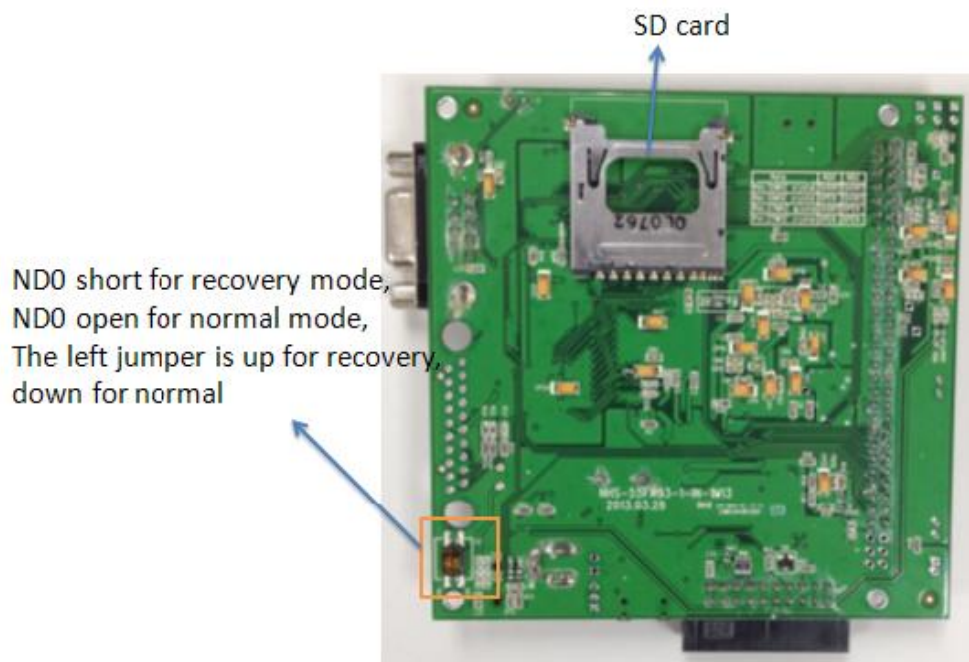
Back View of PCB NHS-55FA93-1-IN-1M1X
